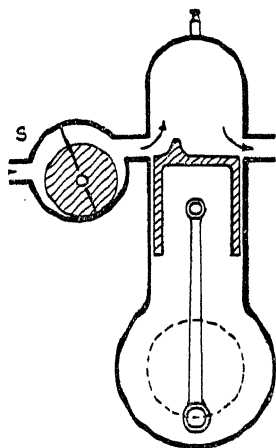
Compressor-charged two-cycle engine. S, compressor; E, exhaust port. Fuel is injected after cylinder ports are closed.
